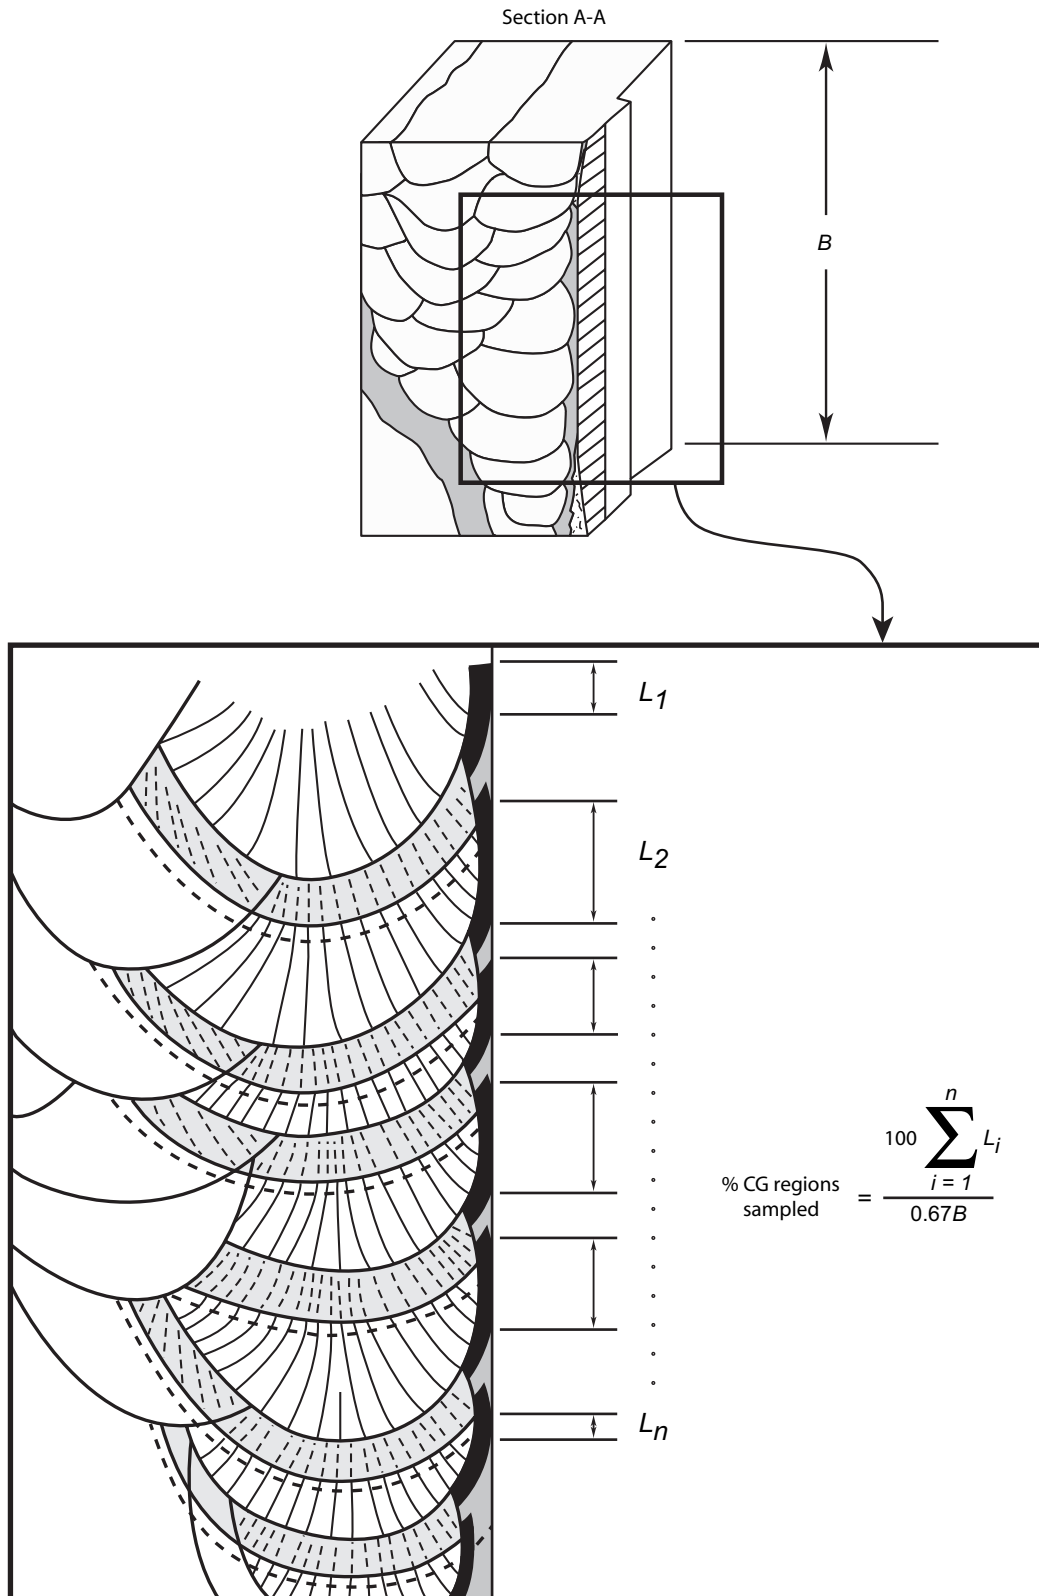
Sectioning the Weld Half of a HAZ CTOD Specimen
